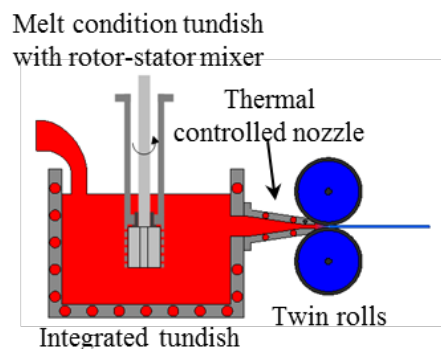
Schematic illustration of MC-TRC process with rotor-stator mixer inline high shear by integrated tundish and shoe tundish equipped with thermally controlled nozzle.
